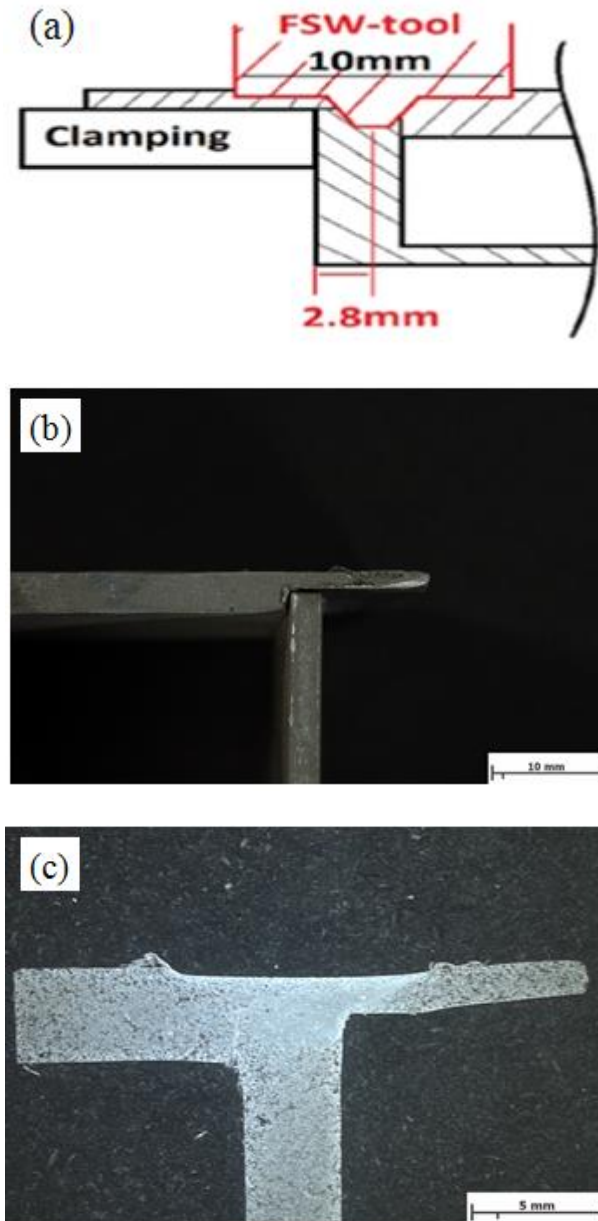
T-joint (a) joint geometry and the FSW-tool position, (b) image of T-joint before FSW and (c) stereomicroscope image of T-joint after FSW.
